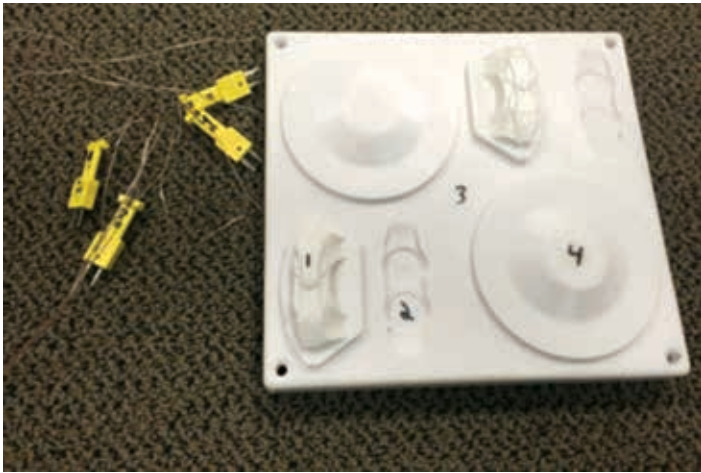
A tool that had many different features was used for cycle testing. The tool contained four thermocouples at the marked locations to measure tool temperature during forming.
